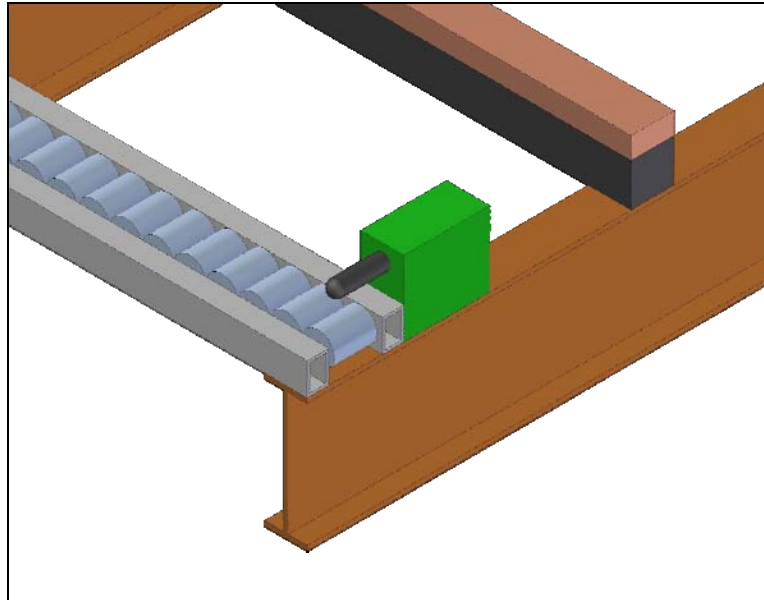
This figure shows the side entering pin locks that will be used on both the air pallet and storage racks.
